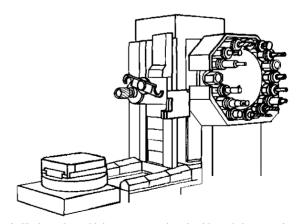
Horizontal machining centre equipped with a chain magazine and a double gripper tool changer
